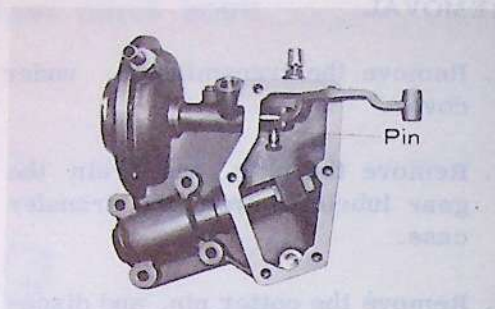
Front Drive Shift V5059 Link Lever Removal
